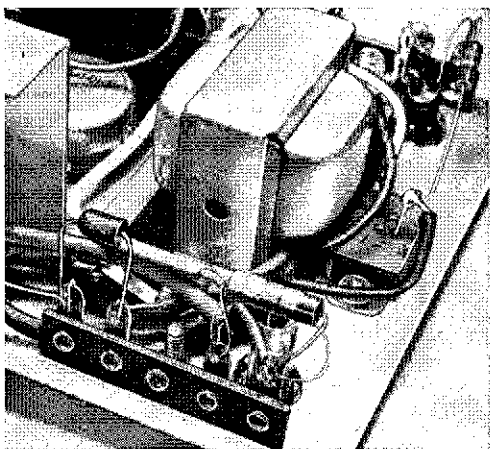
All of the parts can be mounted on the rear of the enclosure cover plate.
